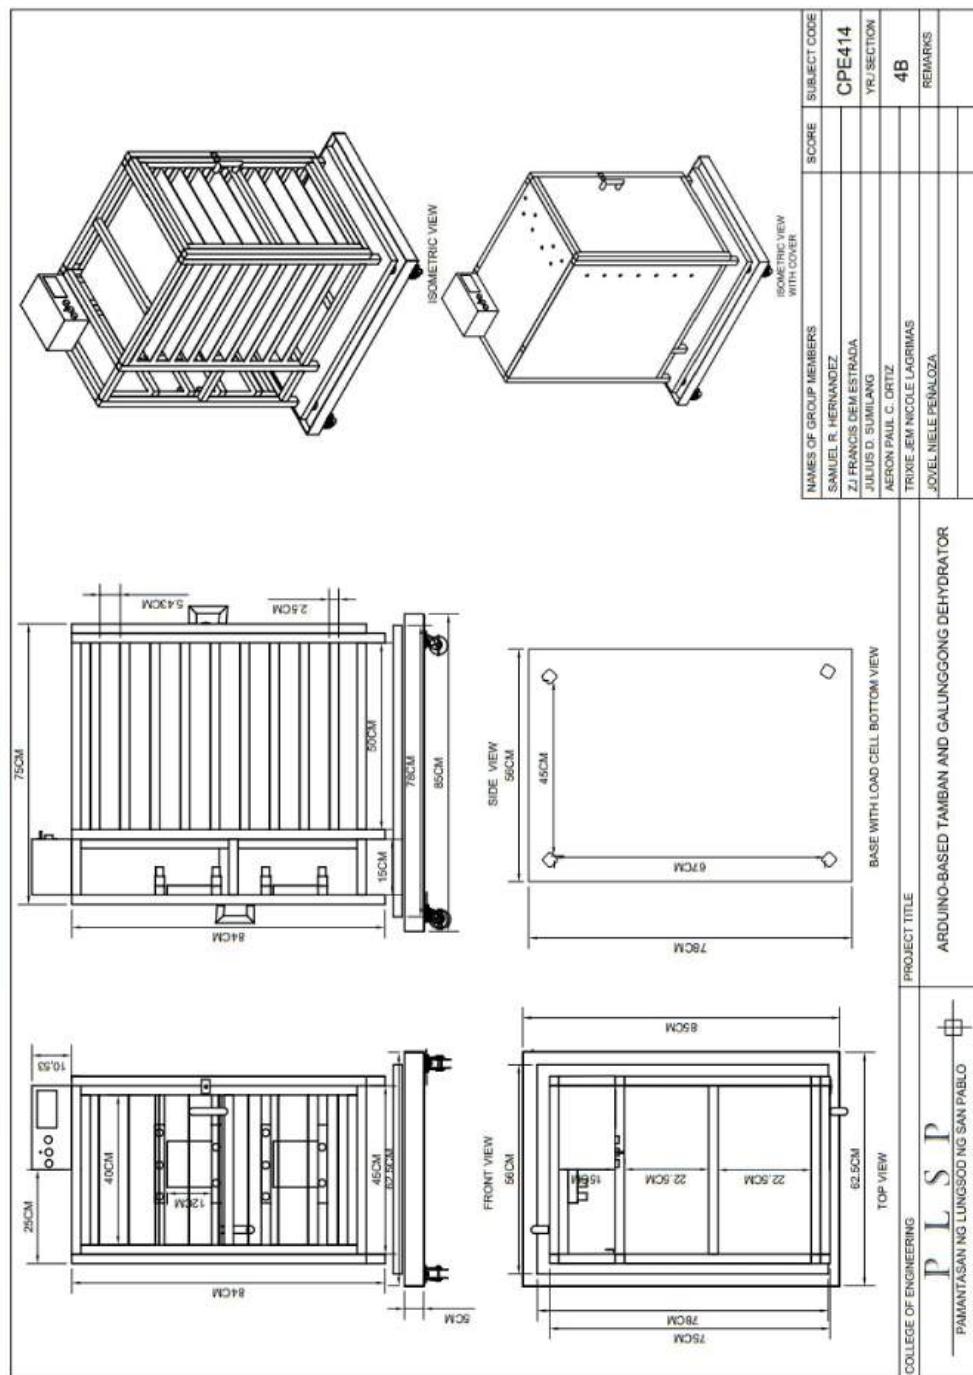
Top, Bottom Front, Side, and Isometric View of the Project
